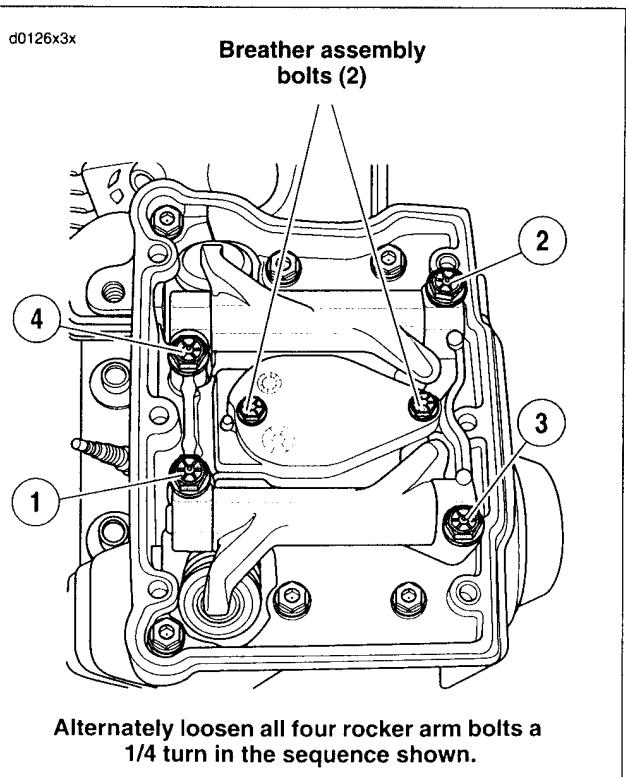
Breather Bolts and Rocker Arm Bolts
